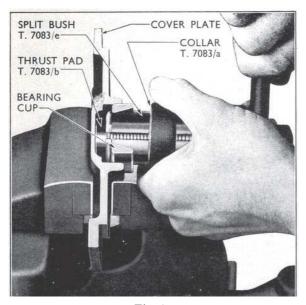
Cover Plate and Bearing Cup Cut-away to show Tool T.7083 Removing Cup
